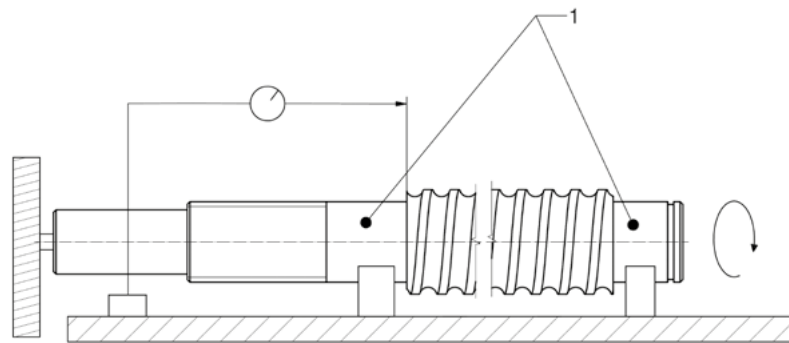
Measurement of the axial run-out $t_{8,2}$ of the bearing surfaces
